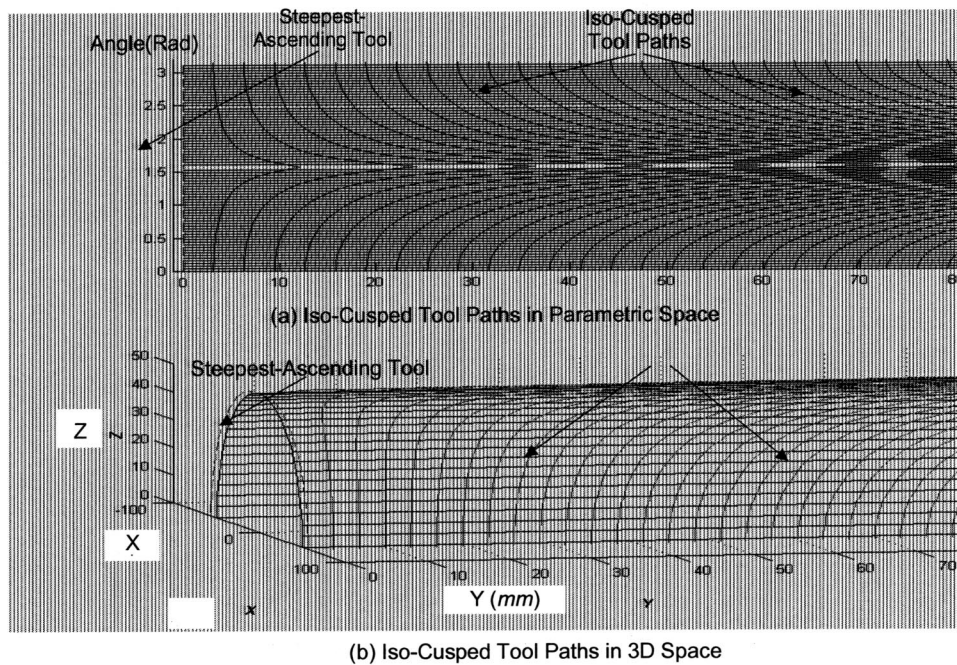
SDIC tool paths with a frame of one steepest-ascending tool path
